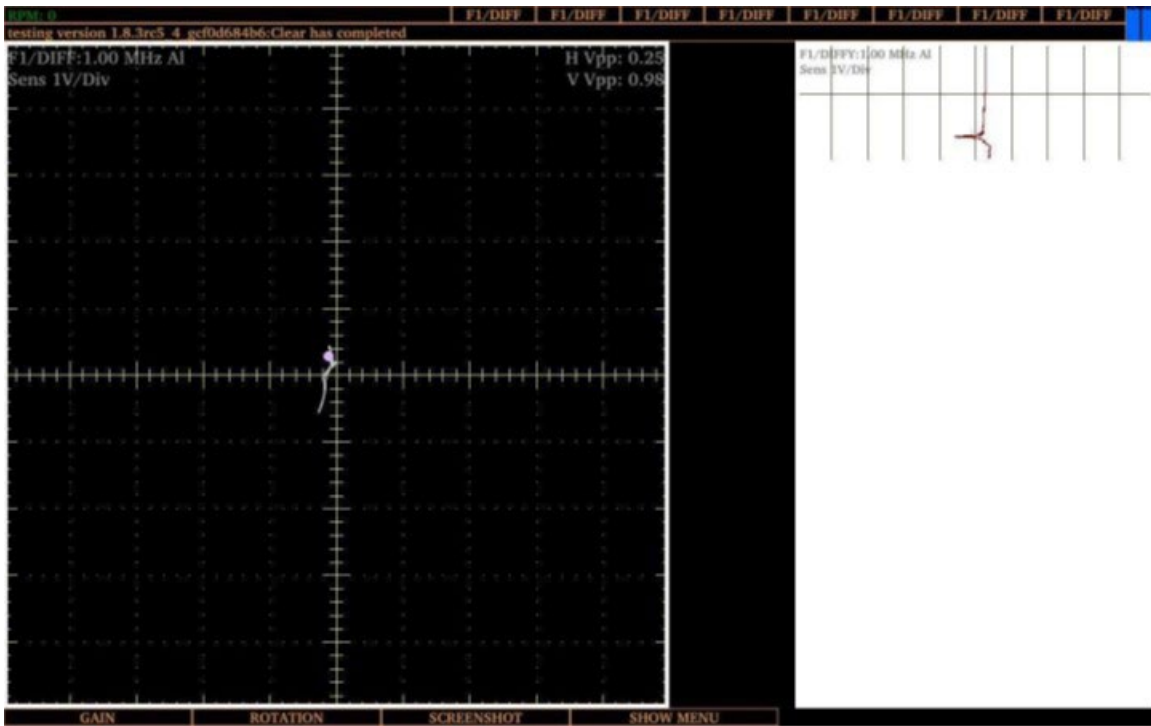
ET indication of defect at Location D in fillet weld test panel MGL-10
